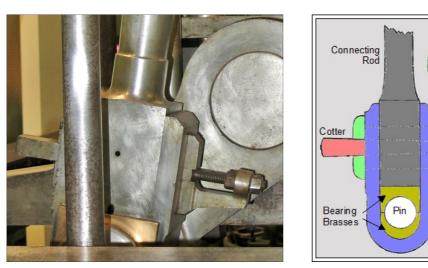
, The connecting rod bearing ends are attached to the crank pins by a wedge cotter, gib and strap arrangement. Detail based on ref. <u>https://commons.wikimedia.org/wiki/Category:Steam_engine_big_ends</u>
